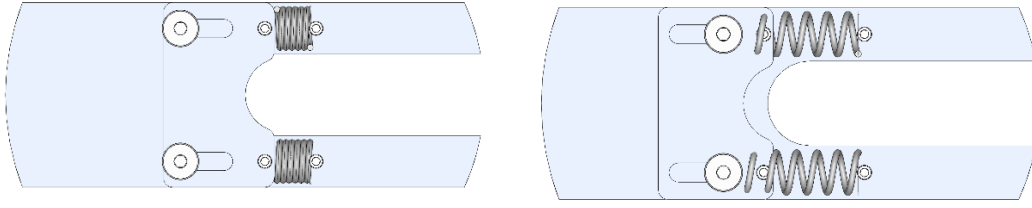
[left] 80°C compression spring design in “closed” position, [right] 80°C compression spring design in “open” position.
